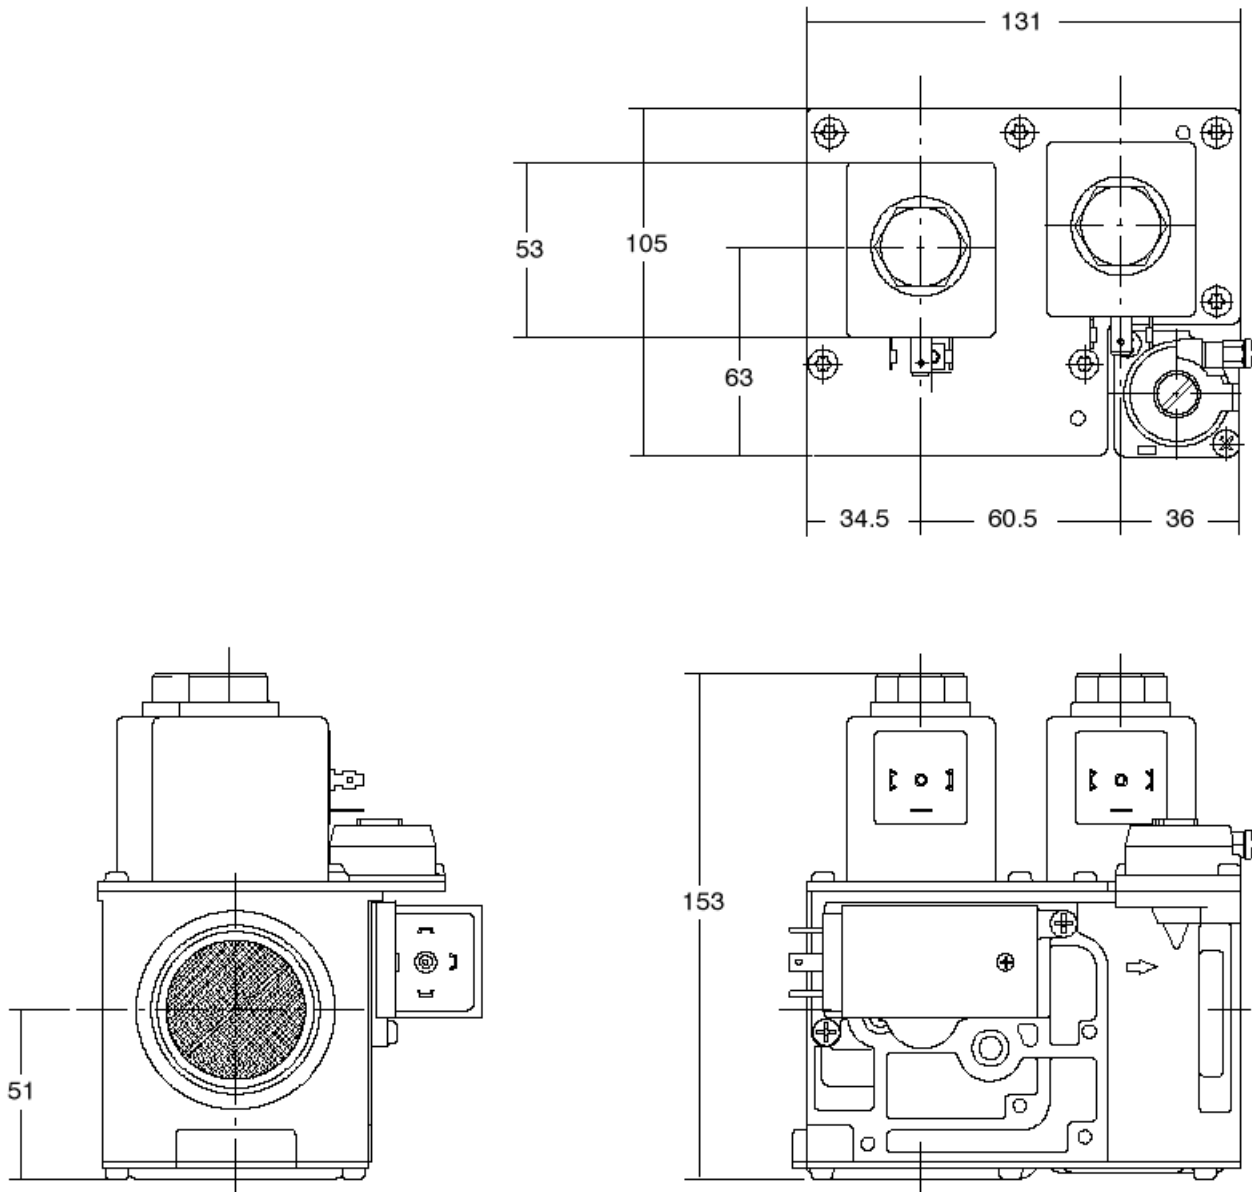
Dimensional drawing VRB15 (DN15), VRB20 (DN 20) and VRB25 (DN 25)
